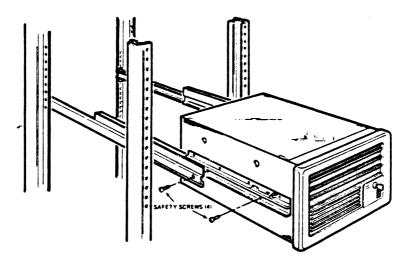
SECURING BOX INTO CHASSIS SLIDE ASSEMBLY
